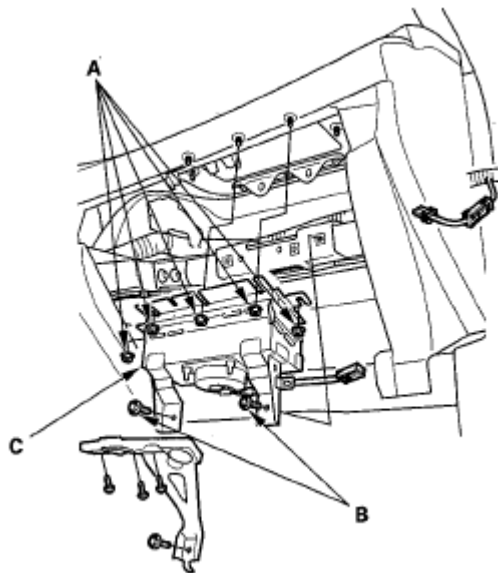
Identifying Bracket Mounting Nuts, Bolts And Front Passenger's Airbag
